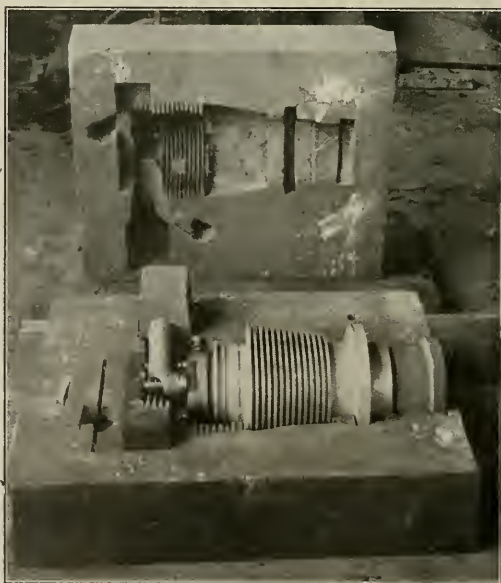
MOLD FOR CASTING ALUMINUM HEAD ON STEEL CYLINDER OF AIR-COOLED AIRPLANE ENGINE. DRY SAND CORES USED INSIDE AND OUTSIDE
